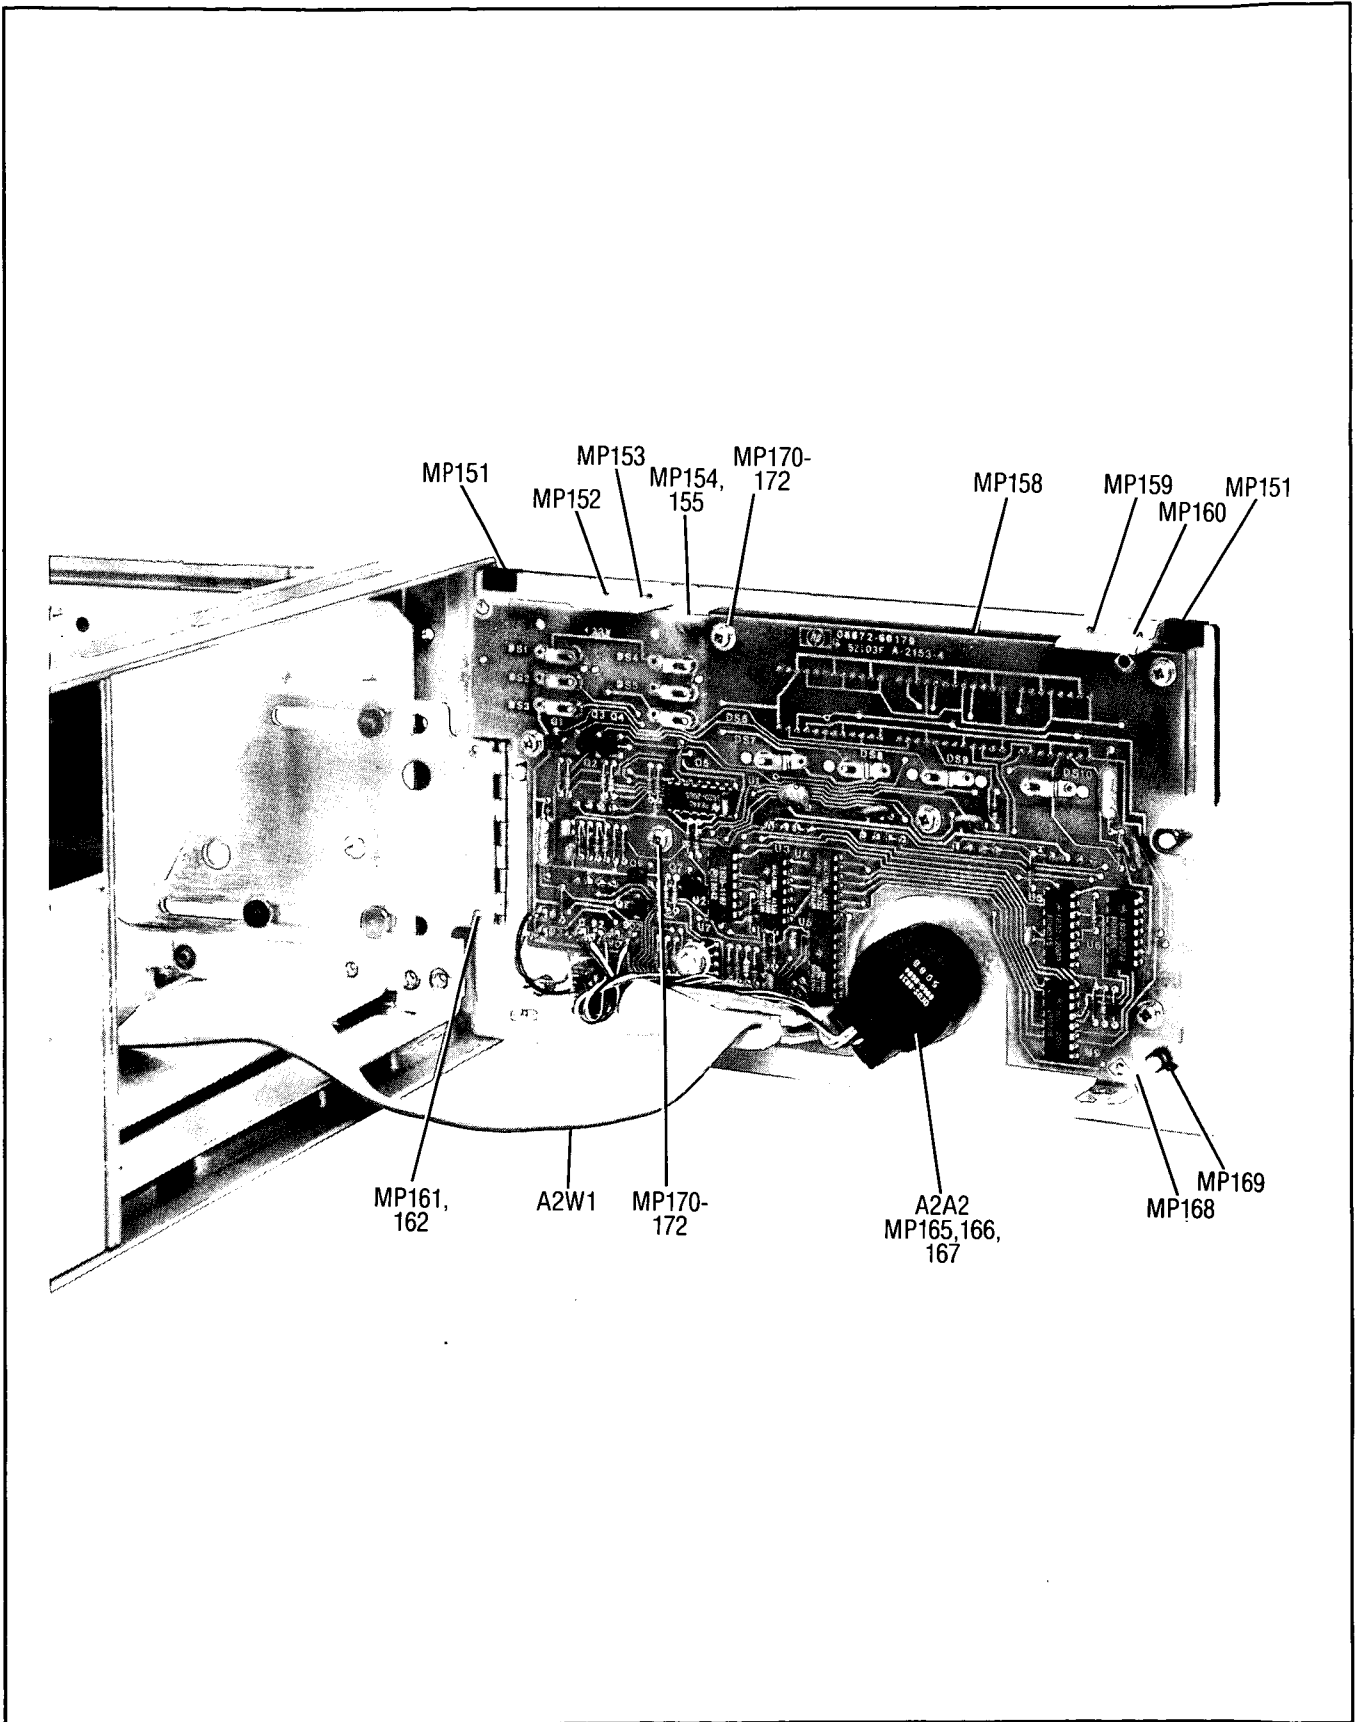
DCU Front Panel, Inside View (Right Side)
